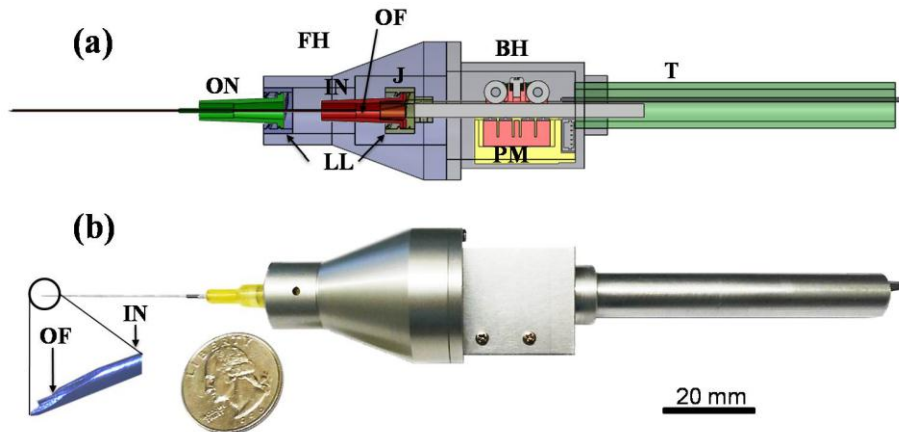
Smart handheld surgical tool. (a) CAD cross-sectional image. FH: front holder, BH: back holder, J: joint, T: tail, ON: outer needle, IN: inner needle, PM: piezoelectric motor, LL: luer-lock combination, OF: optical fiber. (b) Photo image of the tool with a quarter (USA coin) after assembly.
